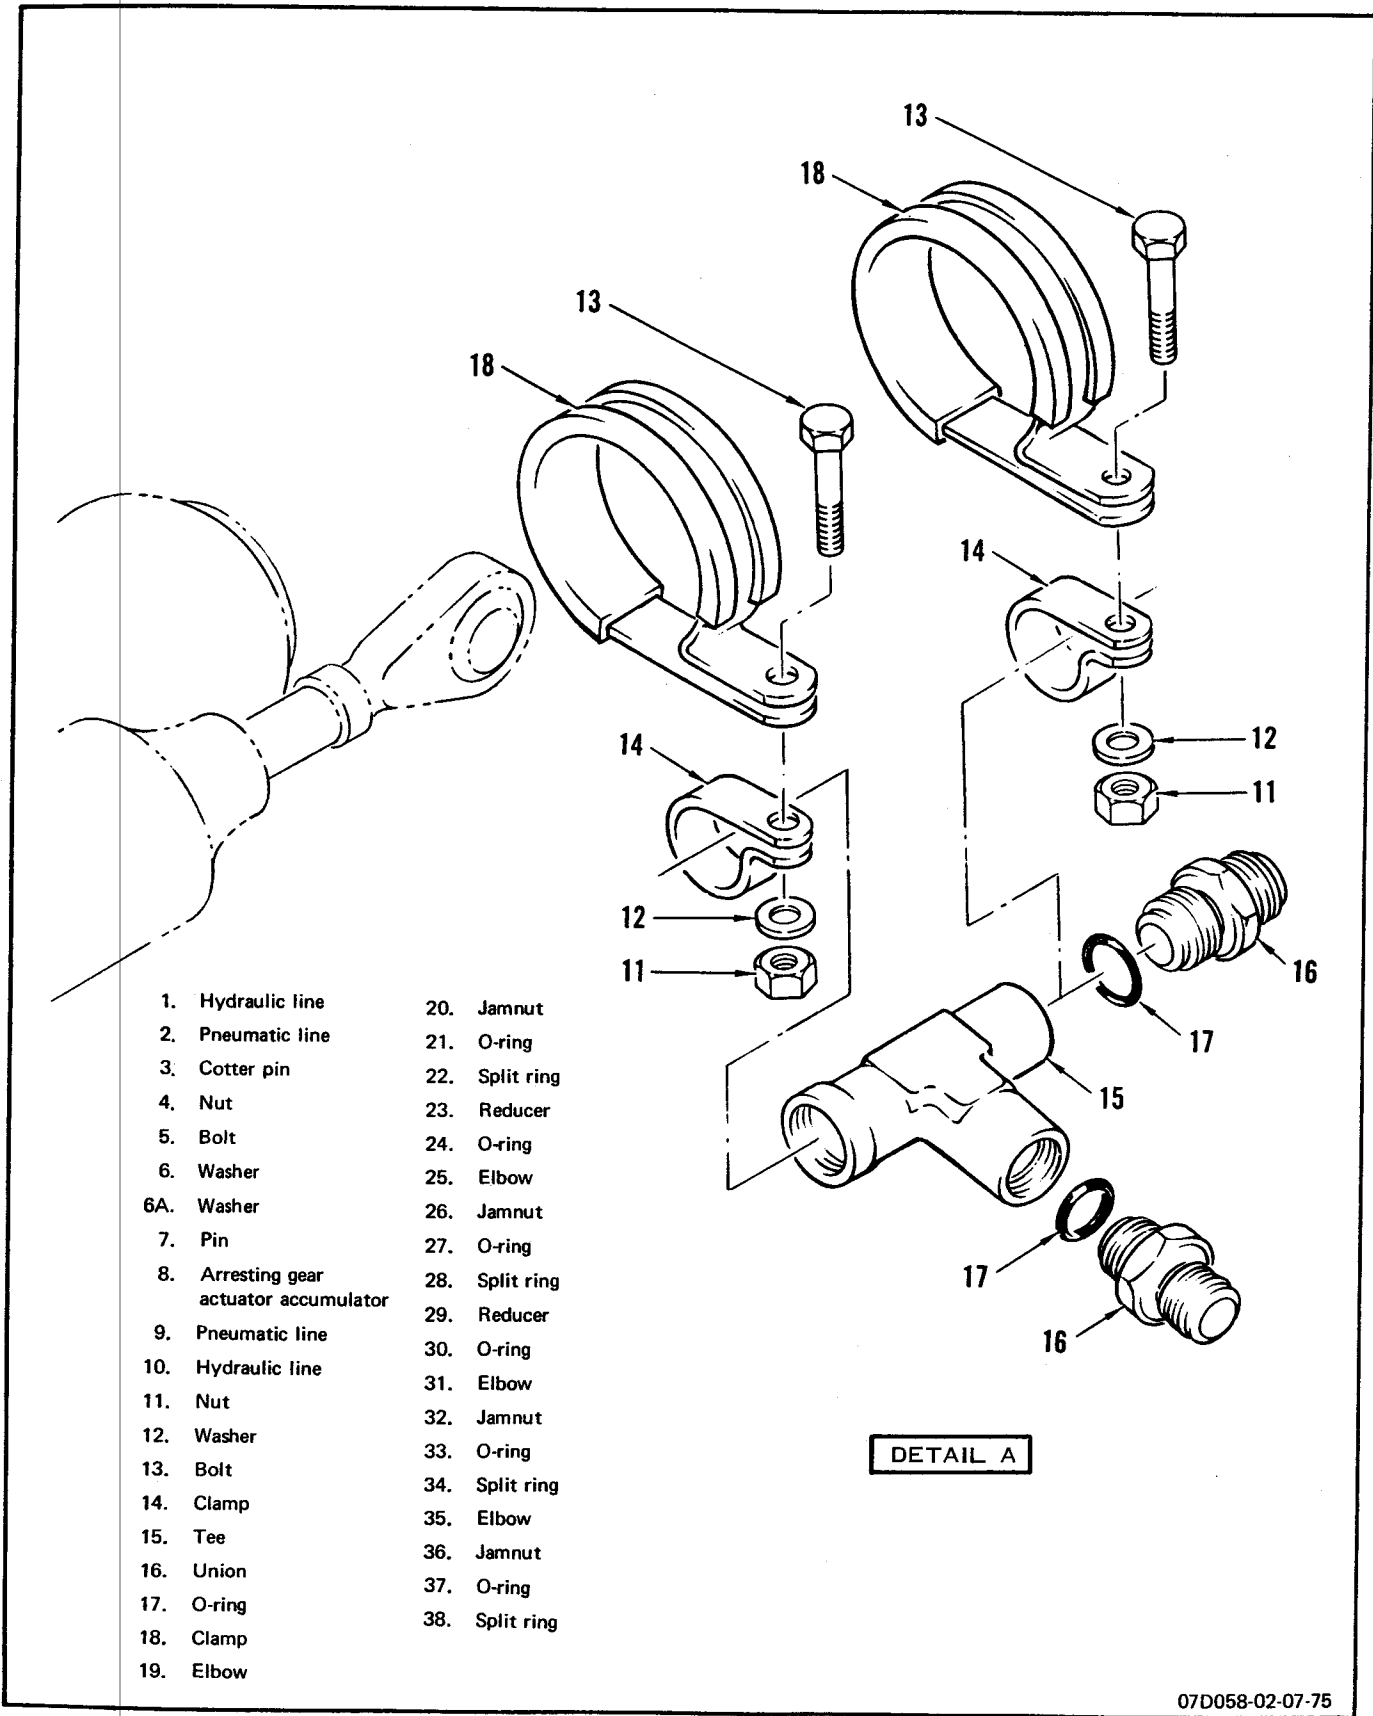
Arresting Gear Actuator Accumulator Removal and Installation (Sheet 1)
